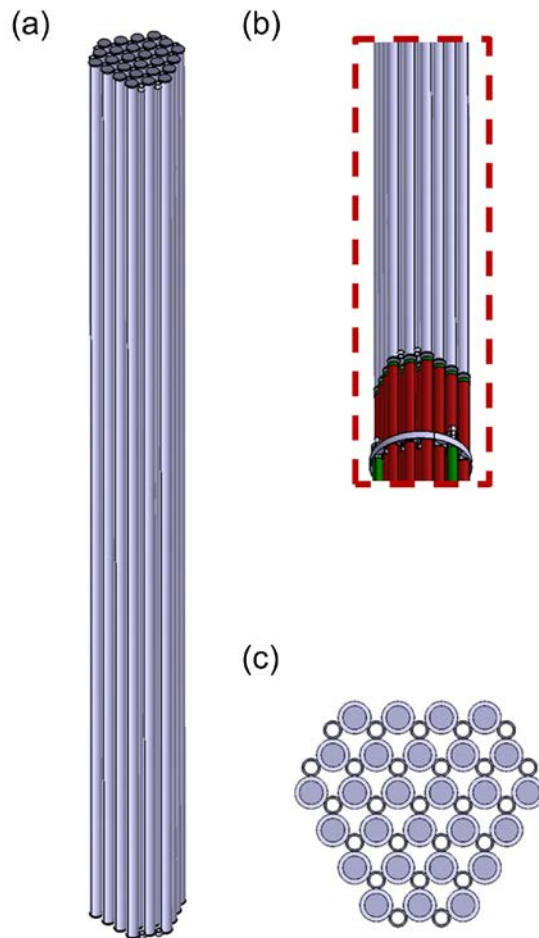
Three-dimensional model of PILLAR dummy rod assembly in several viewpoints. (a) Isomeric view, (b) detail view on the interface with heater rods, and (c) top view
